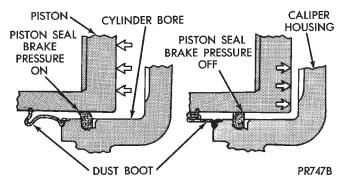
Lining Wear Compensation By Piston Seal DISC BRAKESHOE REMOVAL
